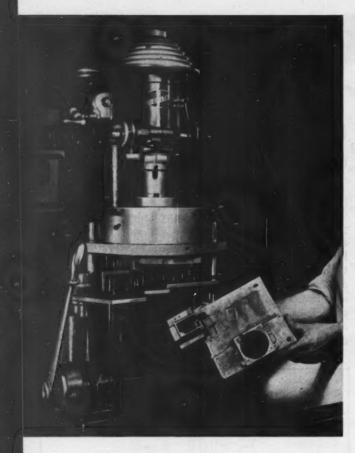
Standard drill press equipped with a multiple-spindle drill head and a pump type workholding jig for drilling the die-casting shown.
